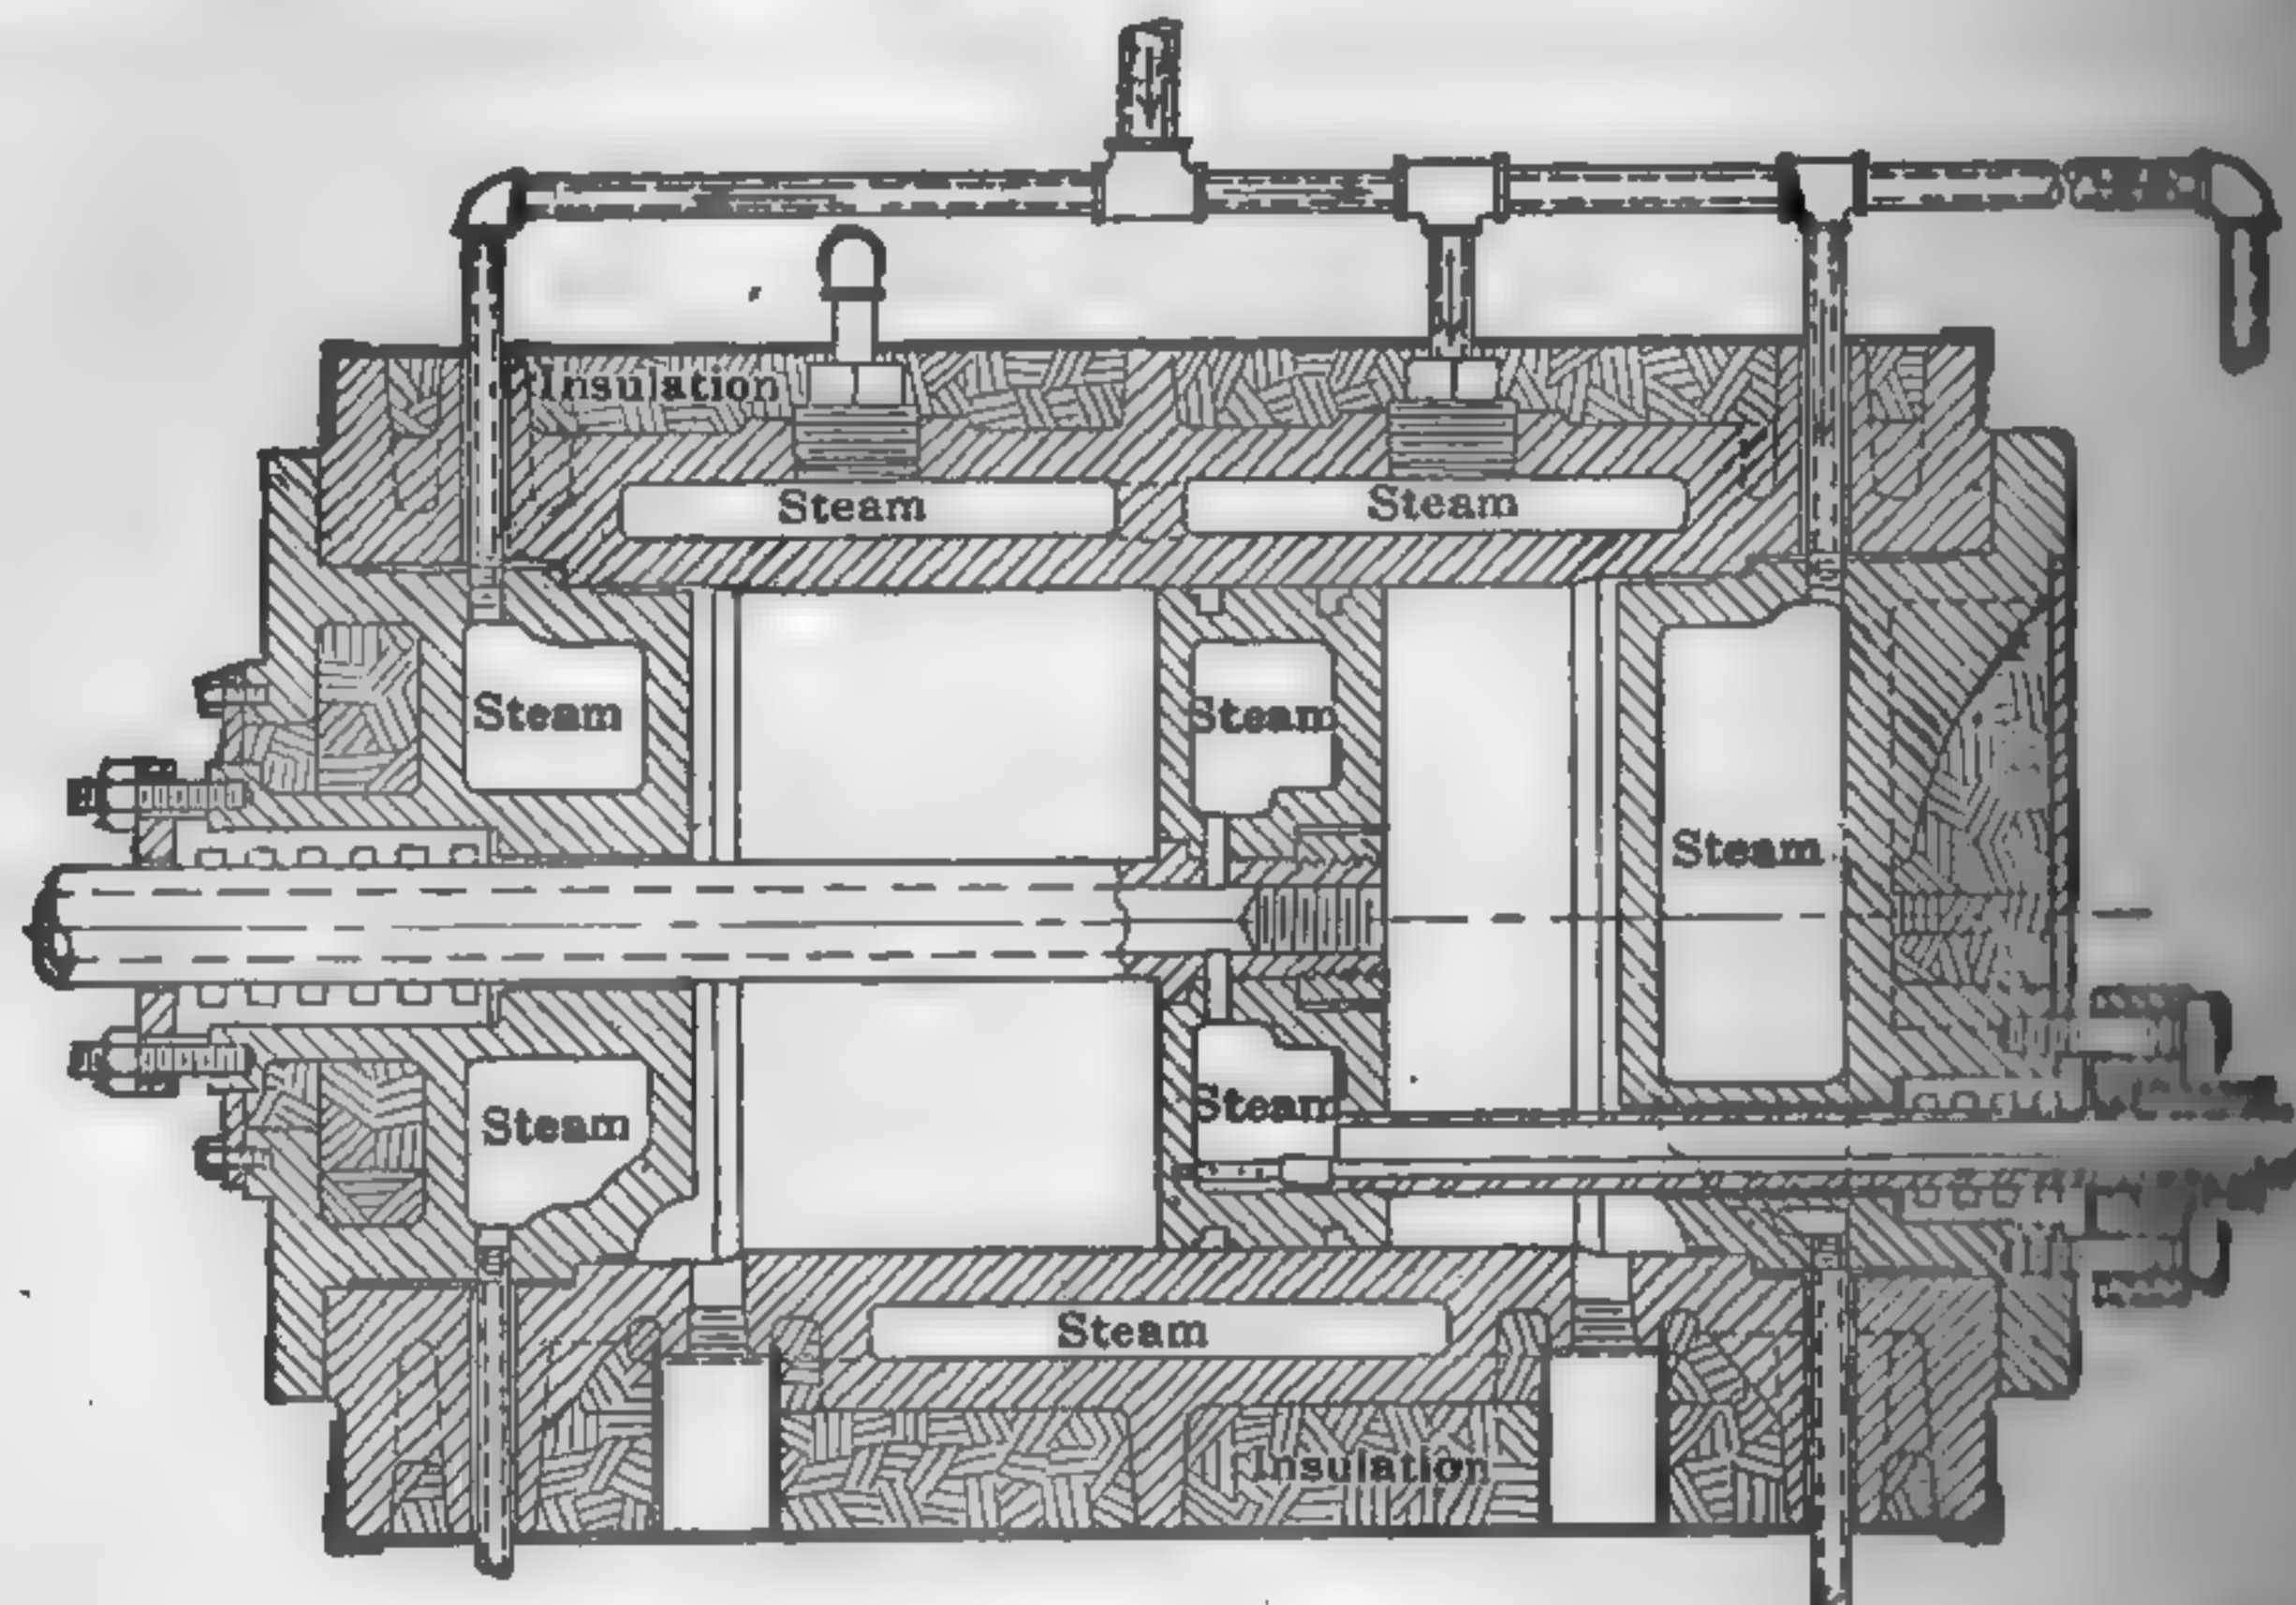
Longitudinal Section through Cylinder of Prosser "High-economy" Engine.
